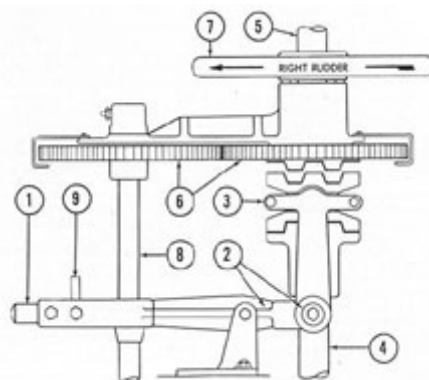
Diagram of clutch and emergency steering wheel spur gears, clutch handle up.
